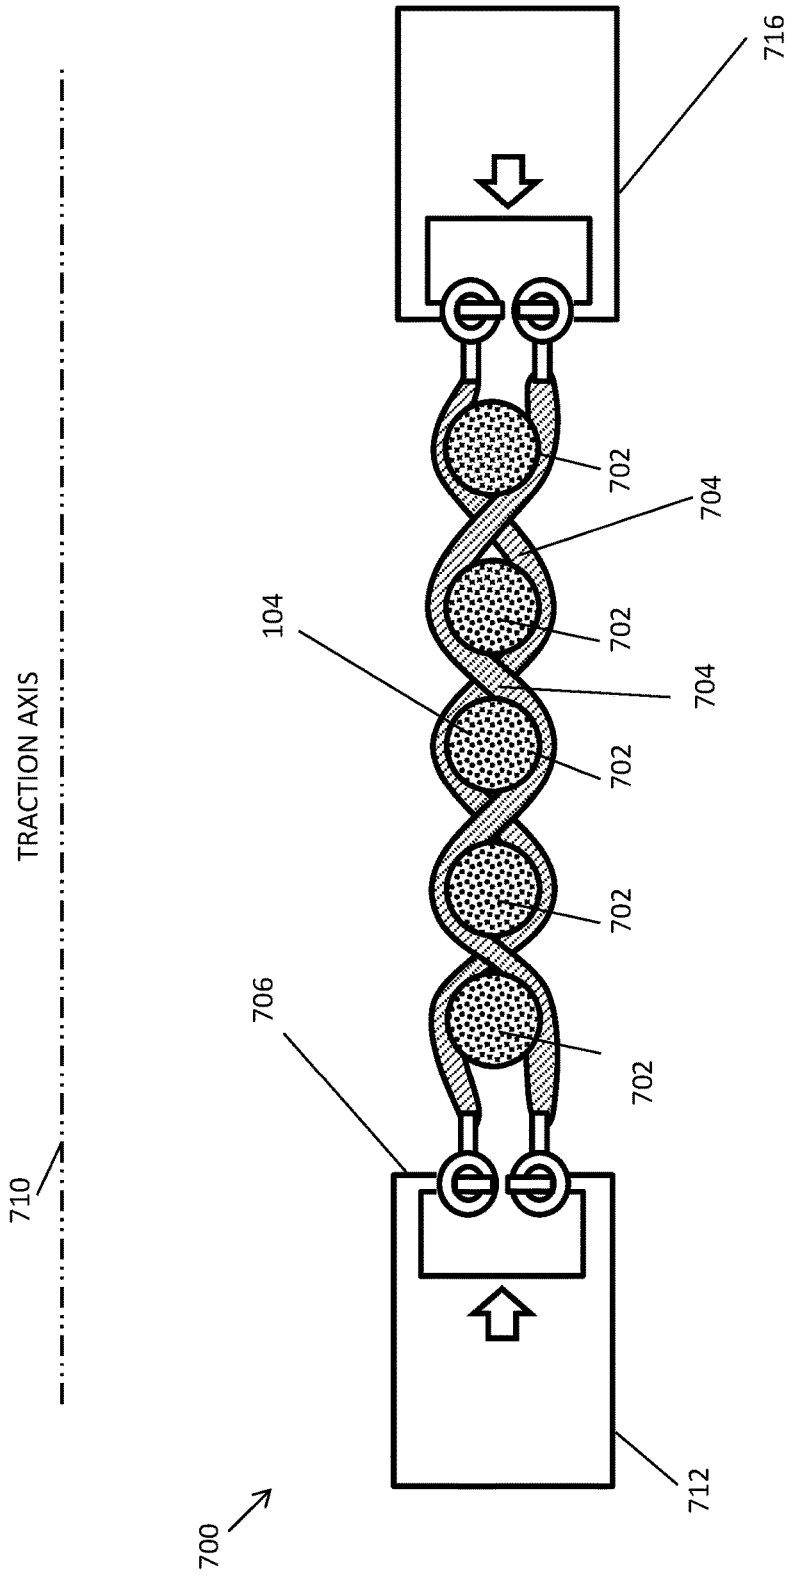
B: TRUE SIDE VIEW, COMPRESSED POSITION
